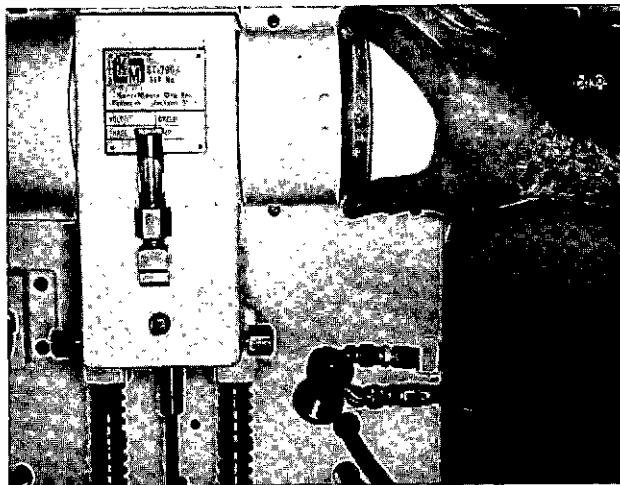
, (F60125). Align the timing wheel mark and the pointer
